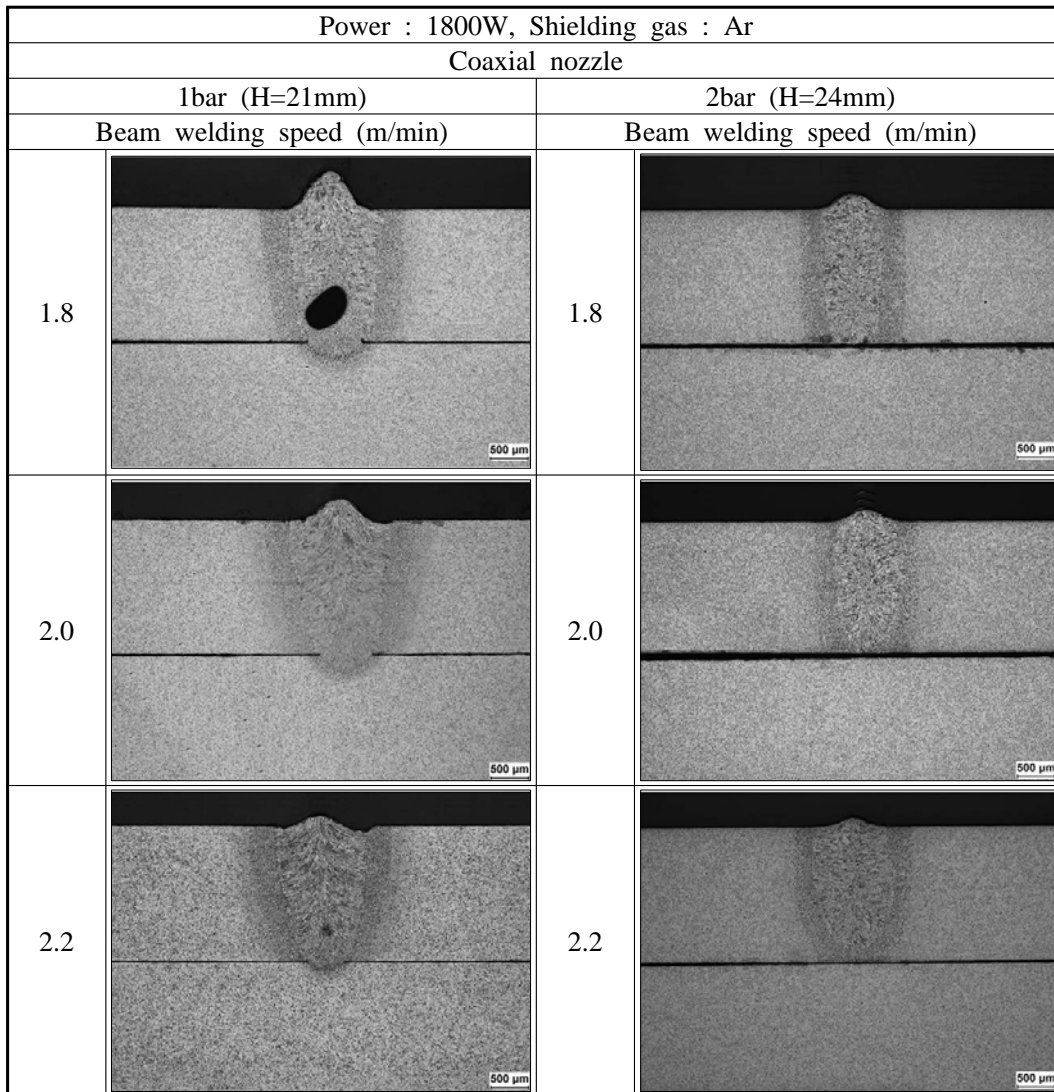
Cross-section of welding zone after coaxial nozzle and beam welding speed
